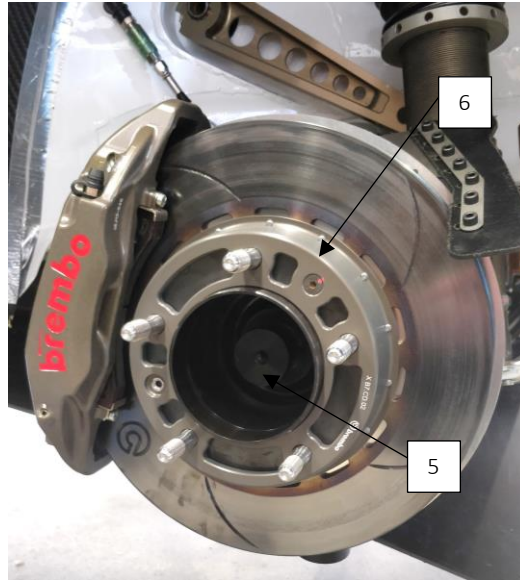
Current Wheel Hub and Brake Disk Adapter
